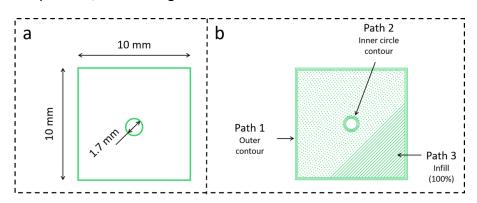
(a) specimen dimensions, and (b) sequence of the hole-making process in FDM
